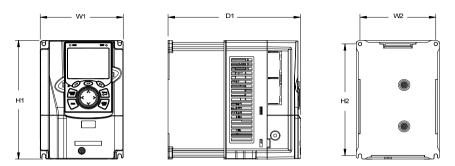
Wall-mounting diagram of inverters of 380 V, 1.5 to 37 kW
